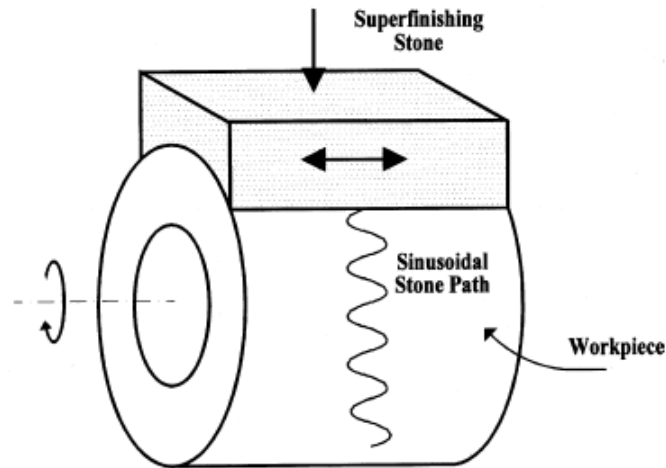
Machining configuration of the cylindrical superfinishing process [Chang *et al.*, 2008]
